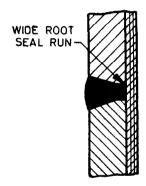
Sealing Run in a Welded Butt Joint
